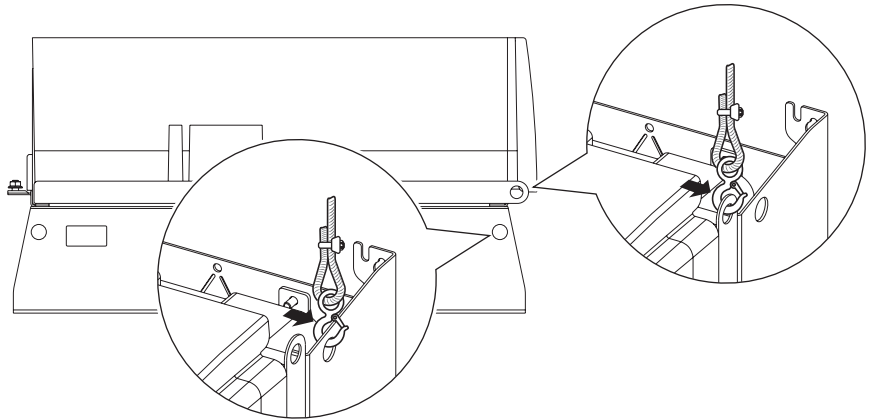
Frame 7 Open Type and Flange Mount: Weight: 72.6...108.9 kg (160...240 lb)
